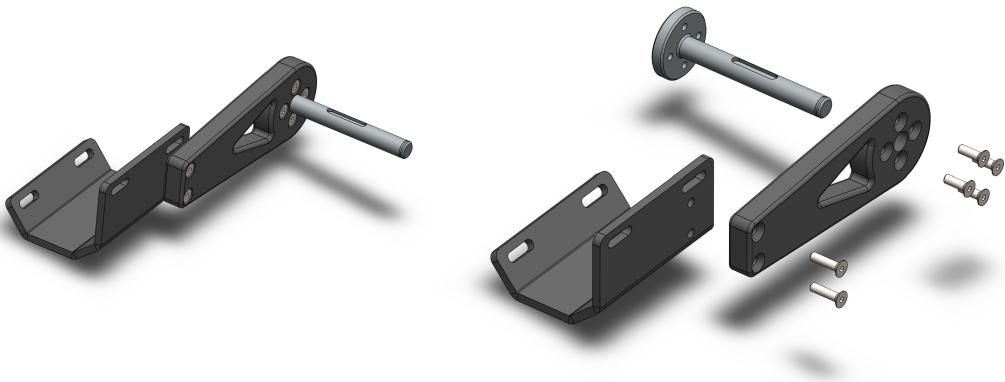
The forearm connector in its assembled and exploded state. This sub-assembly consists of a curved forearm holder and linkage both made of plastic, an axle made of steel connecting the sub-assembly to the rest of the skeleton and 6 countersunk M5 screws holds everything together.
